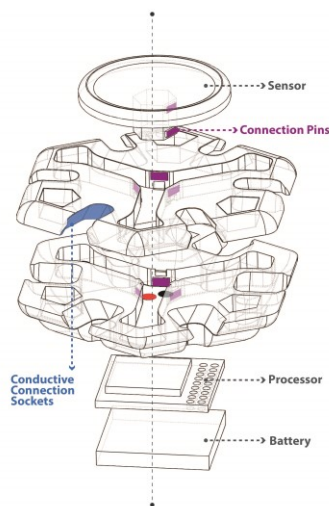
Exploded perspective which shows the components of a Snowflake Module
